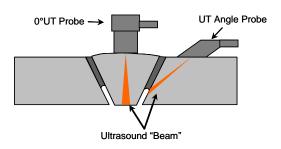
Compression (0°) and Angle probe UT Probe Weld Scans
